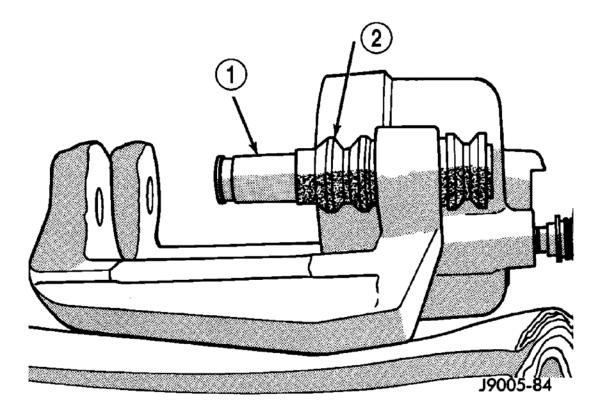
Installing Bushings & Boots - Typical Courtesy of CHRYSLER LLC
